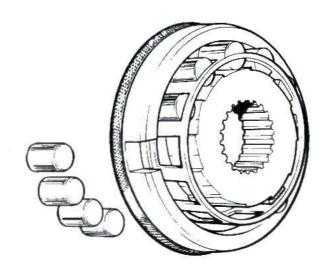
UNI-DIRECTIONAL CLUTCH ASSEMBLY
